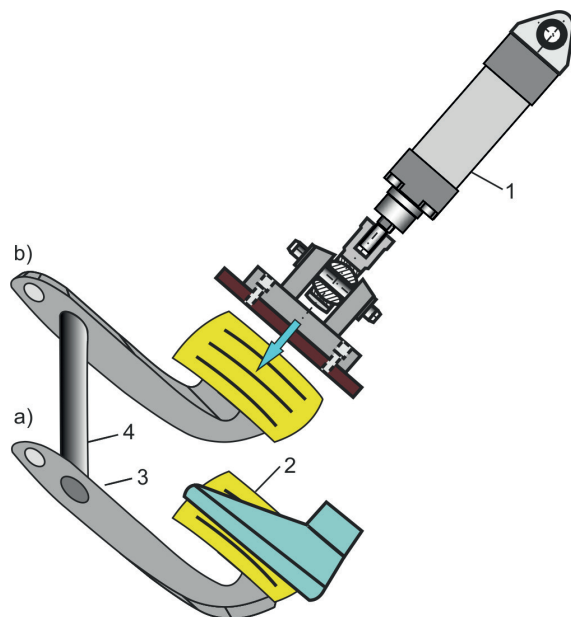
Dual foot brake pedals: a) primary driver brake pedal, b) secondary brake pedal with pneumatic assistance, 1 - pneumatic actuator assembly, 2 - brake pedal pad, 3 - brake pedal arm, 4 - tubular shaft.
